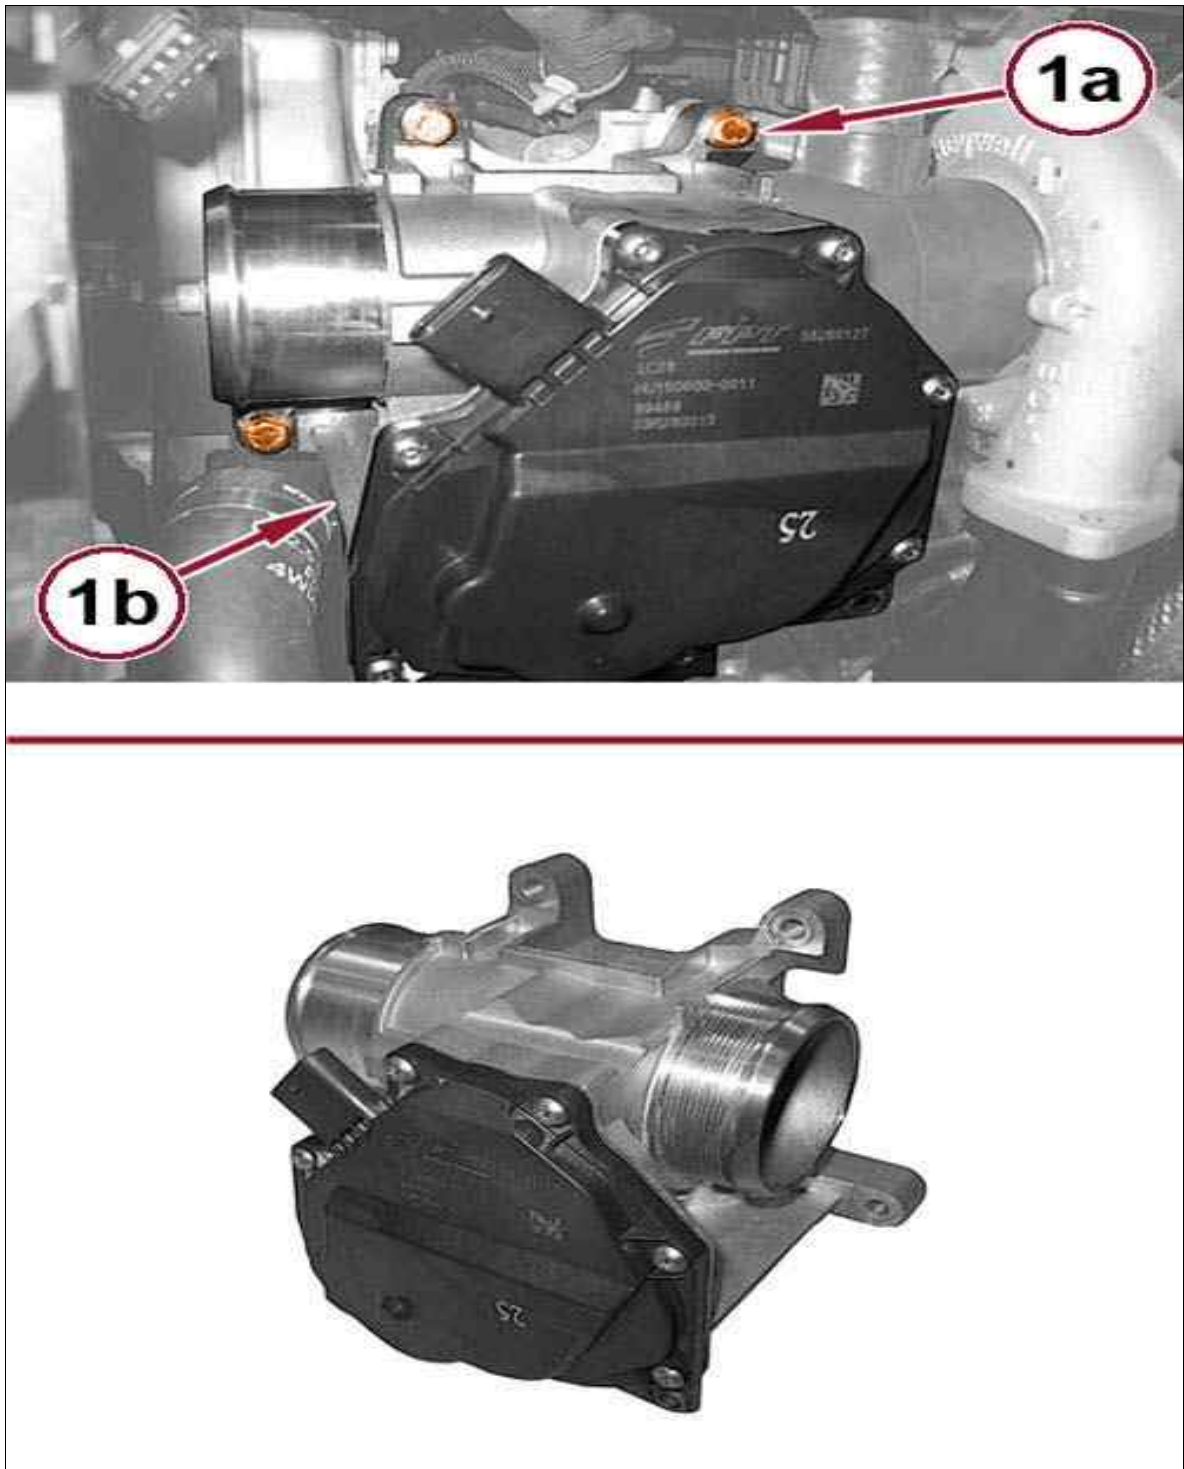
EGR Air Flow Control Valve Bolt & Clamp
